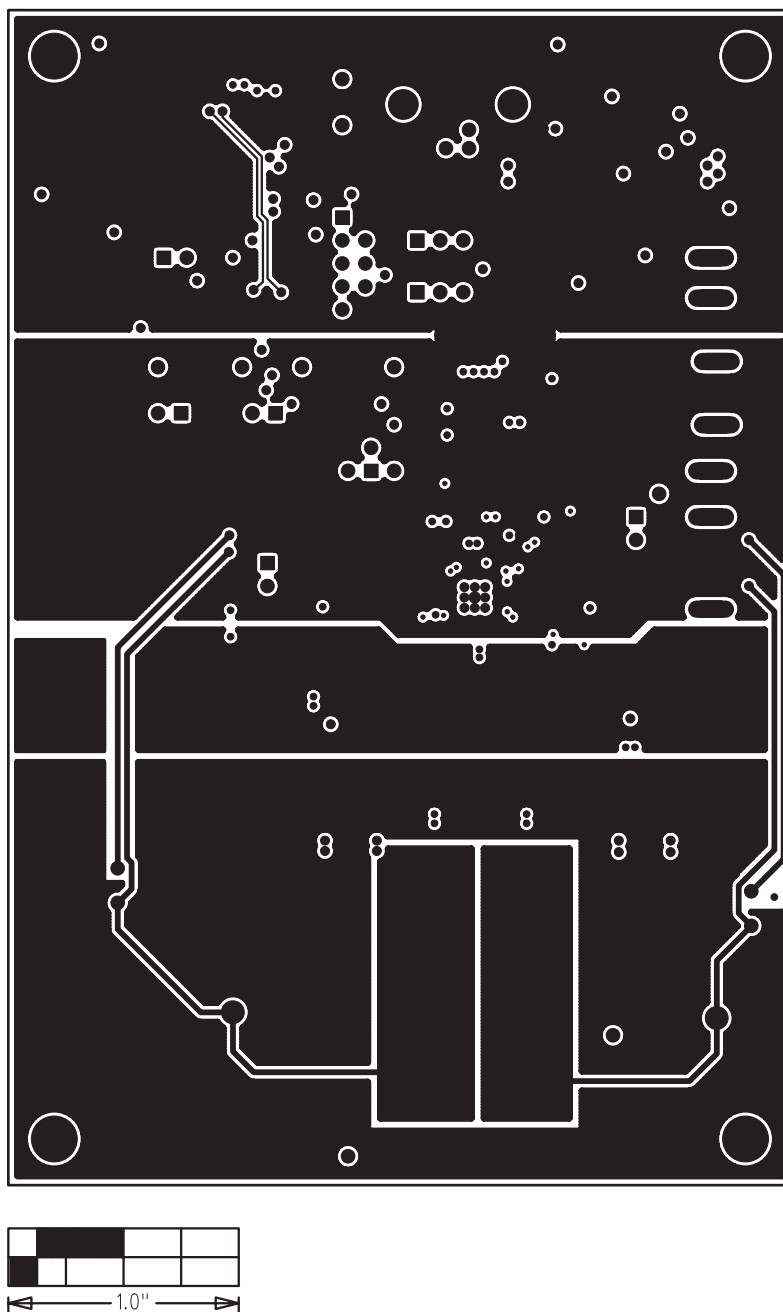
MAX17480 EV Kit PCB Layout—Internal Layer 3
